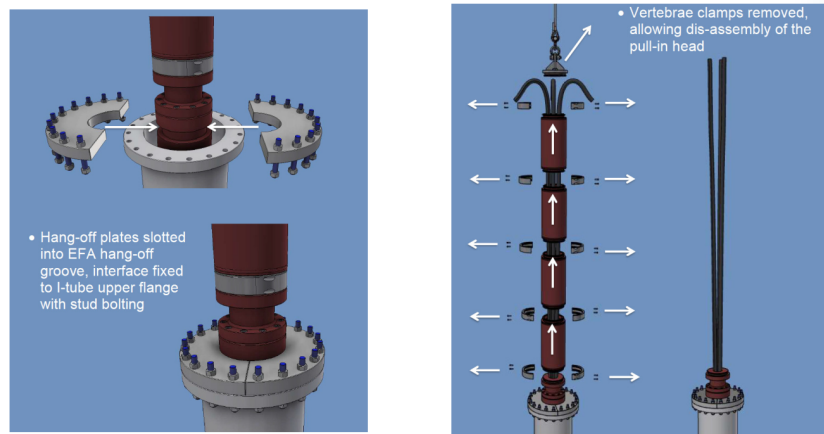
Flange at top of I-tube secures umbilical (left), and conductors broken out (right).
